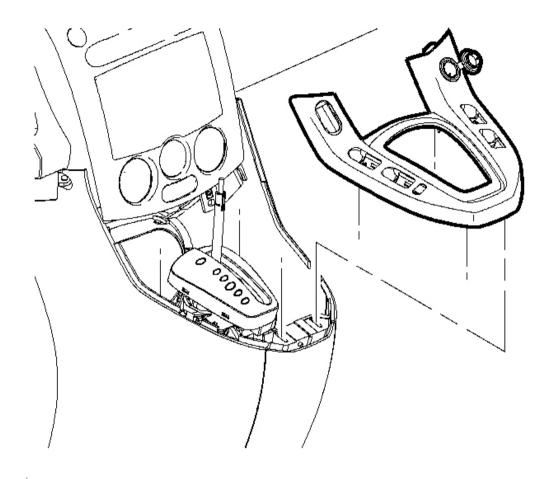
View Of Trans Floor Shift Control Indicator Lamp Courtesy of GENERAL MOTORS CORP.
